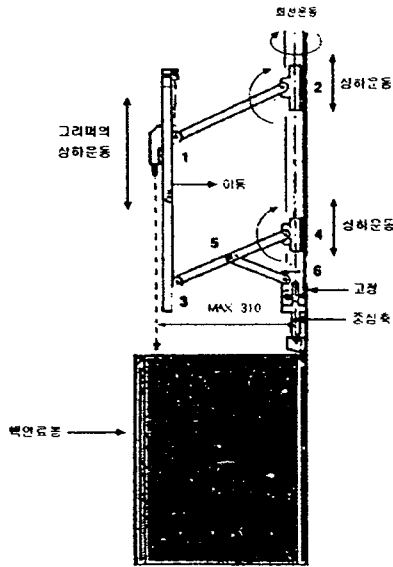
Robot Manipulator Removing Nuclear Fuel Rod (1~6 : Joint Positions)
